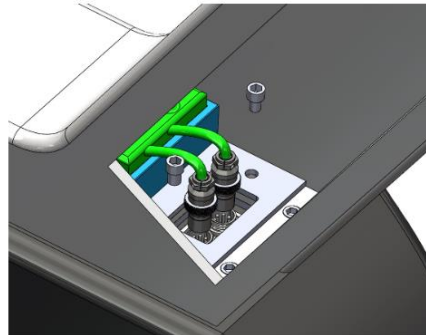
Removal of the motor module, the sequence is rotated for re-mounting of the motor module.
